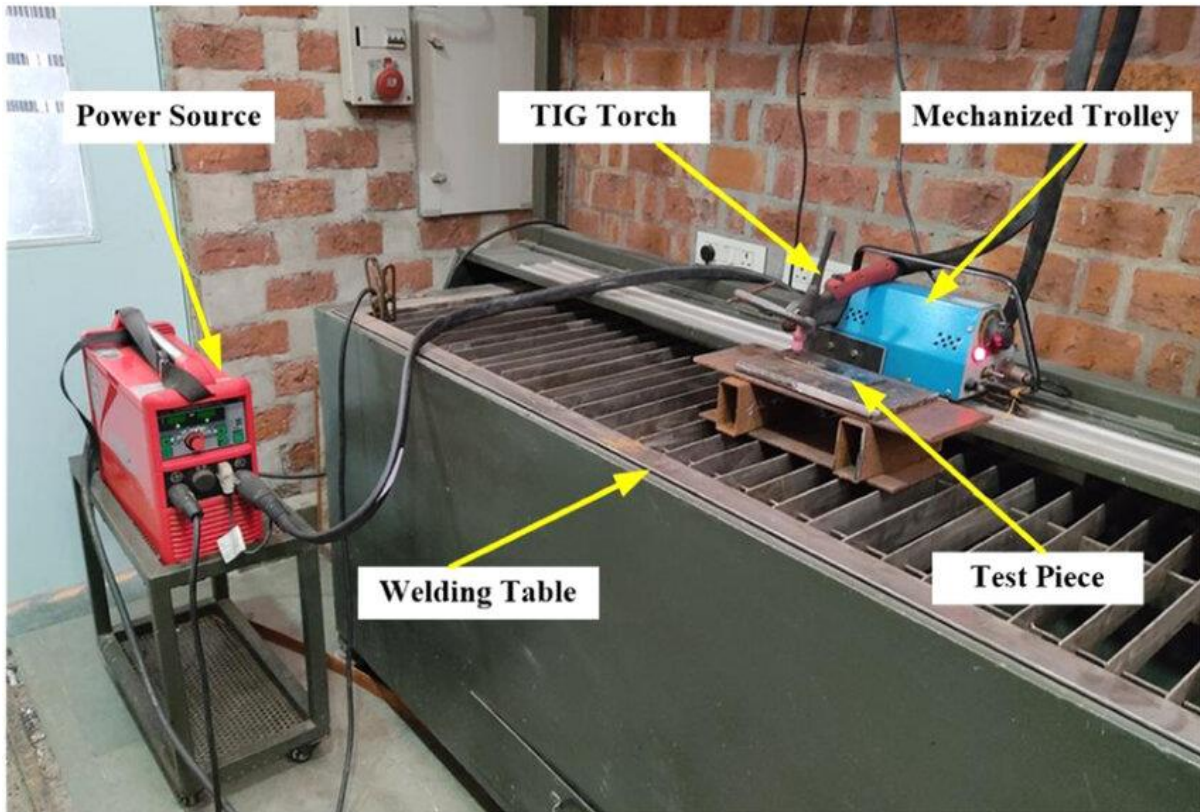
GTAW setup employed for fabrication of stainless-steel weld joints.
